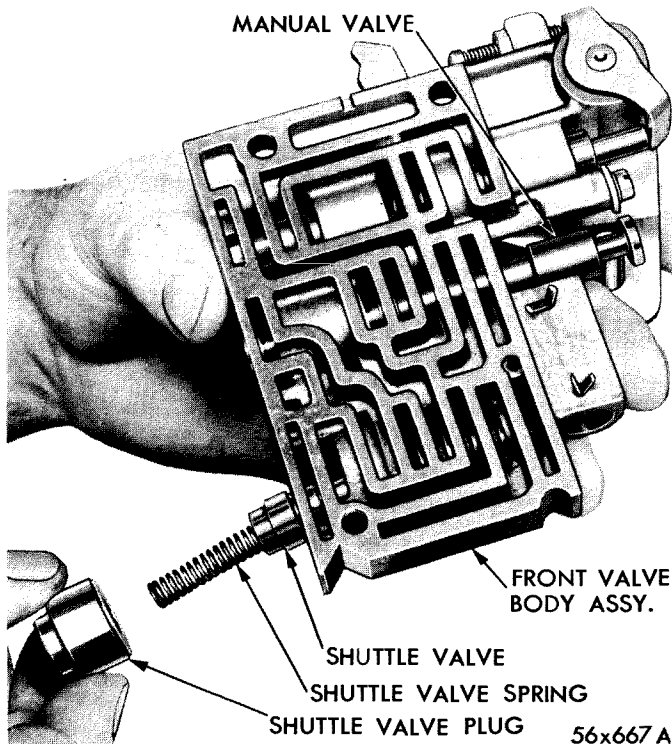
Removal and Installation of Shuttle Valve, Plug, Spring and Valve
